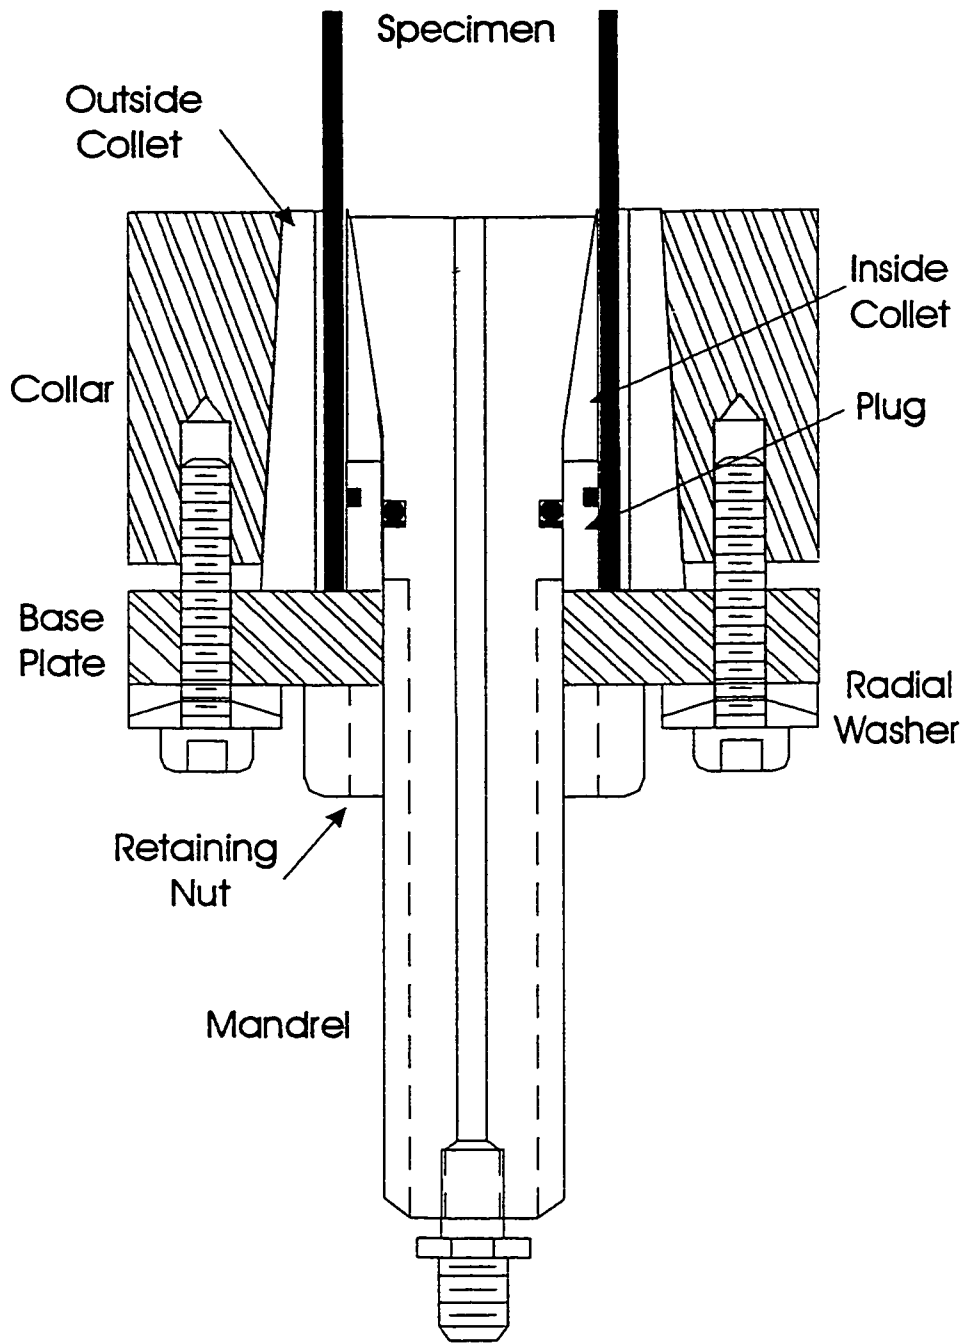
Schematic illustration of the redesigned grip assembly.
